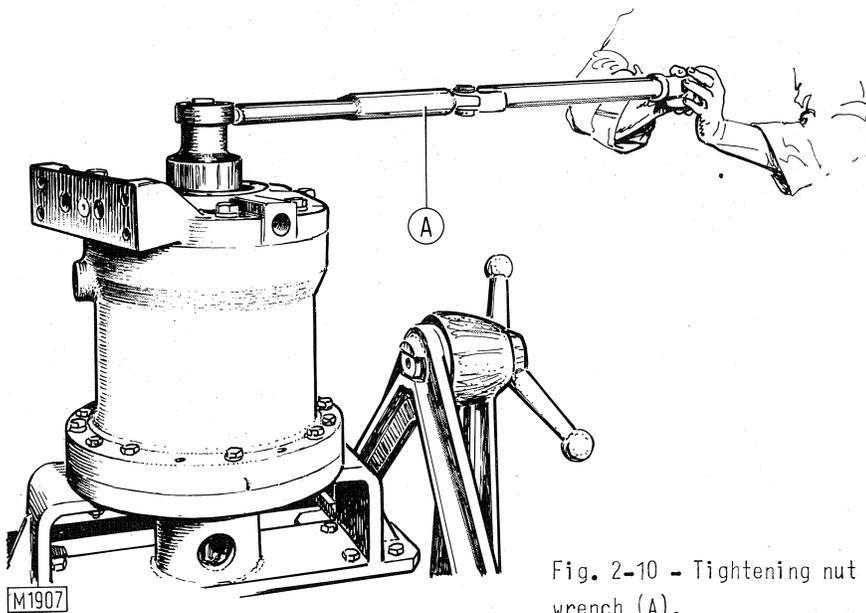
Tightening nut (3, fig. 2-1) using torque wrench (A).
